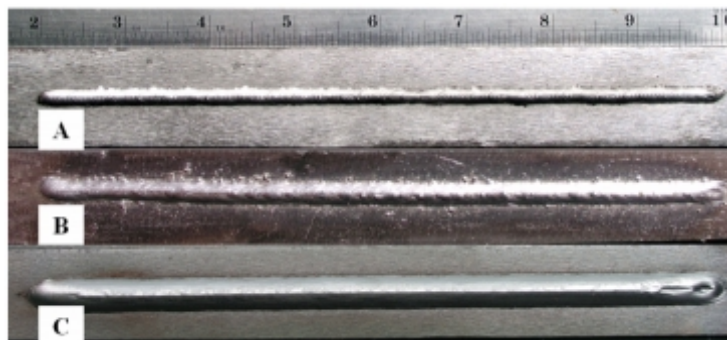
Weld bead resulting from each welding condition in Table 1 (A) Short-circuit transfer (B) Globular transfer and (C) Spray transfer.
